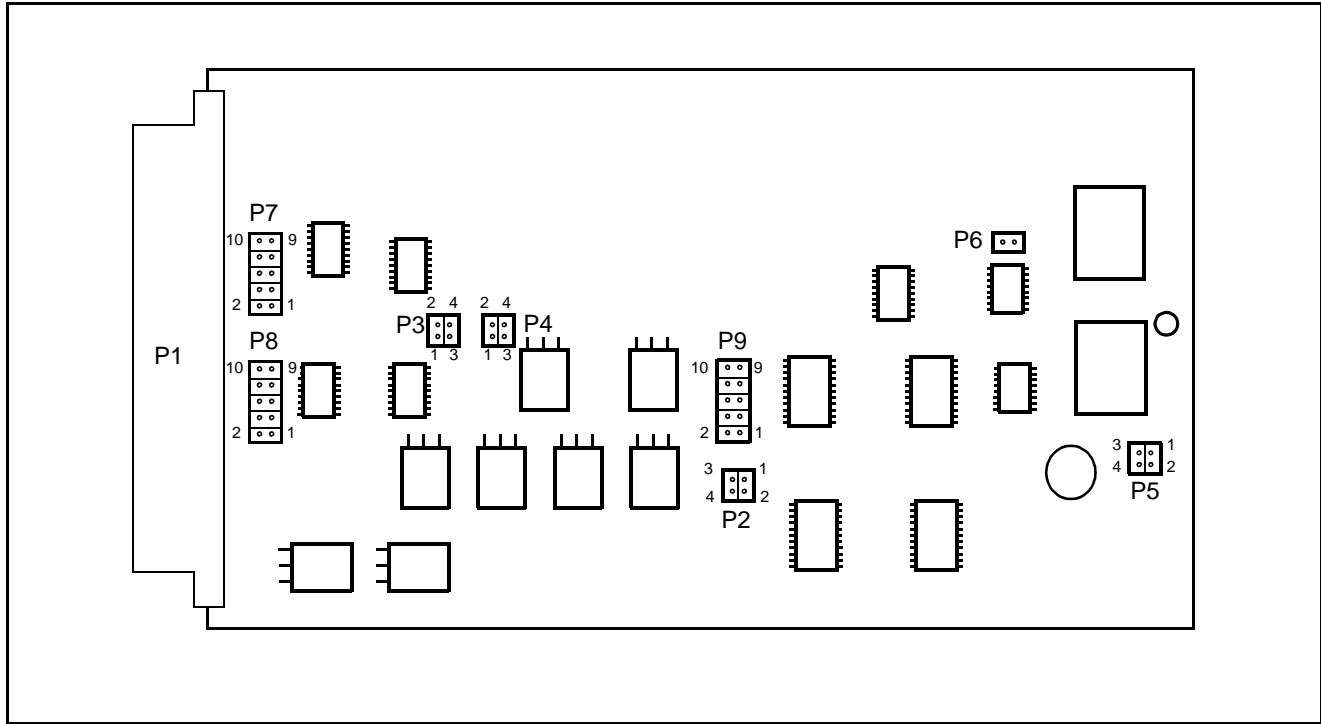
CLN1206 Auxiliary I/O Board Jumpers
